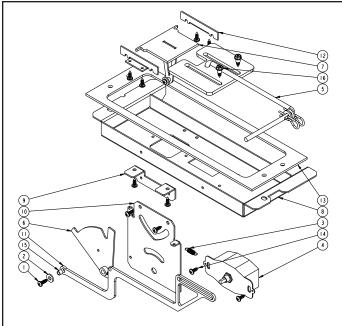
Exploded View of Entire Assembly for Point of Reference only
